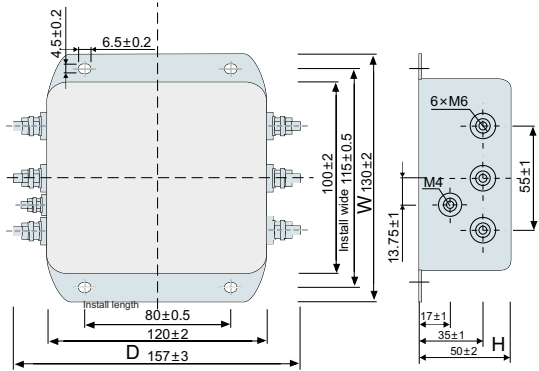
Simple Filter Outline and Installation Dimension Figure
